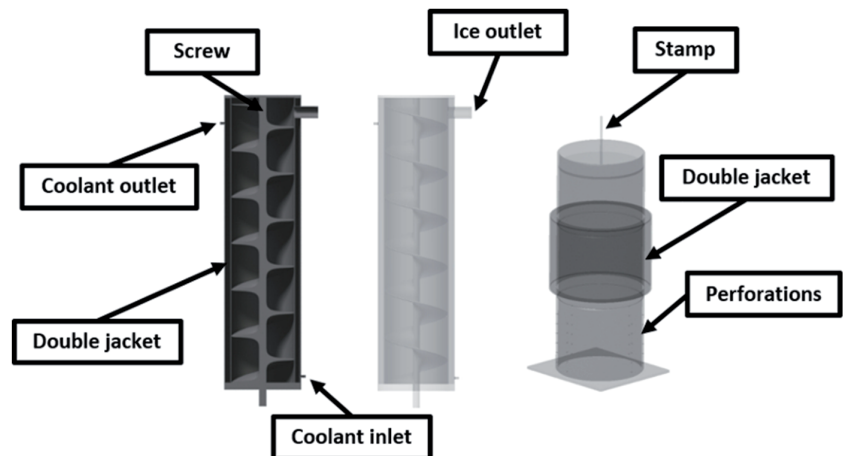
Schematic sectional drawing of the screw crystallizer and the pressing mold
